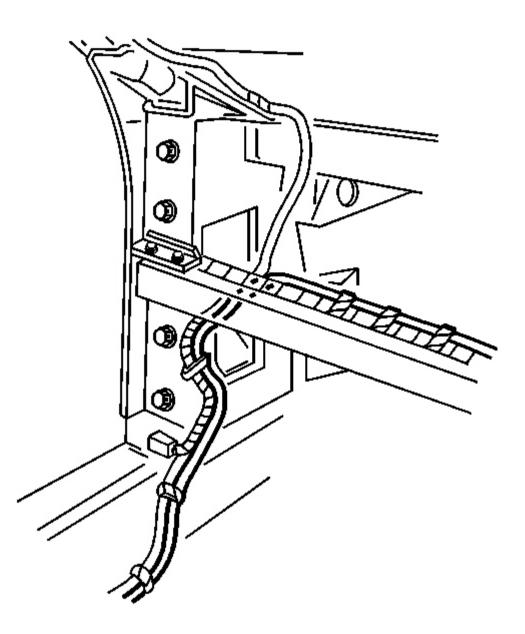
Coaxial Cable At Insulation Tape Along The Hinge Pillar Courtesy of GENERAL MOTORS CORP.
